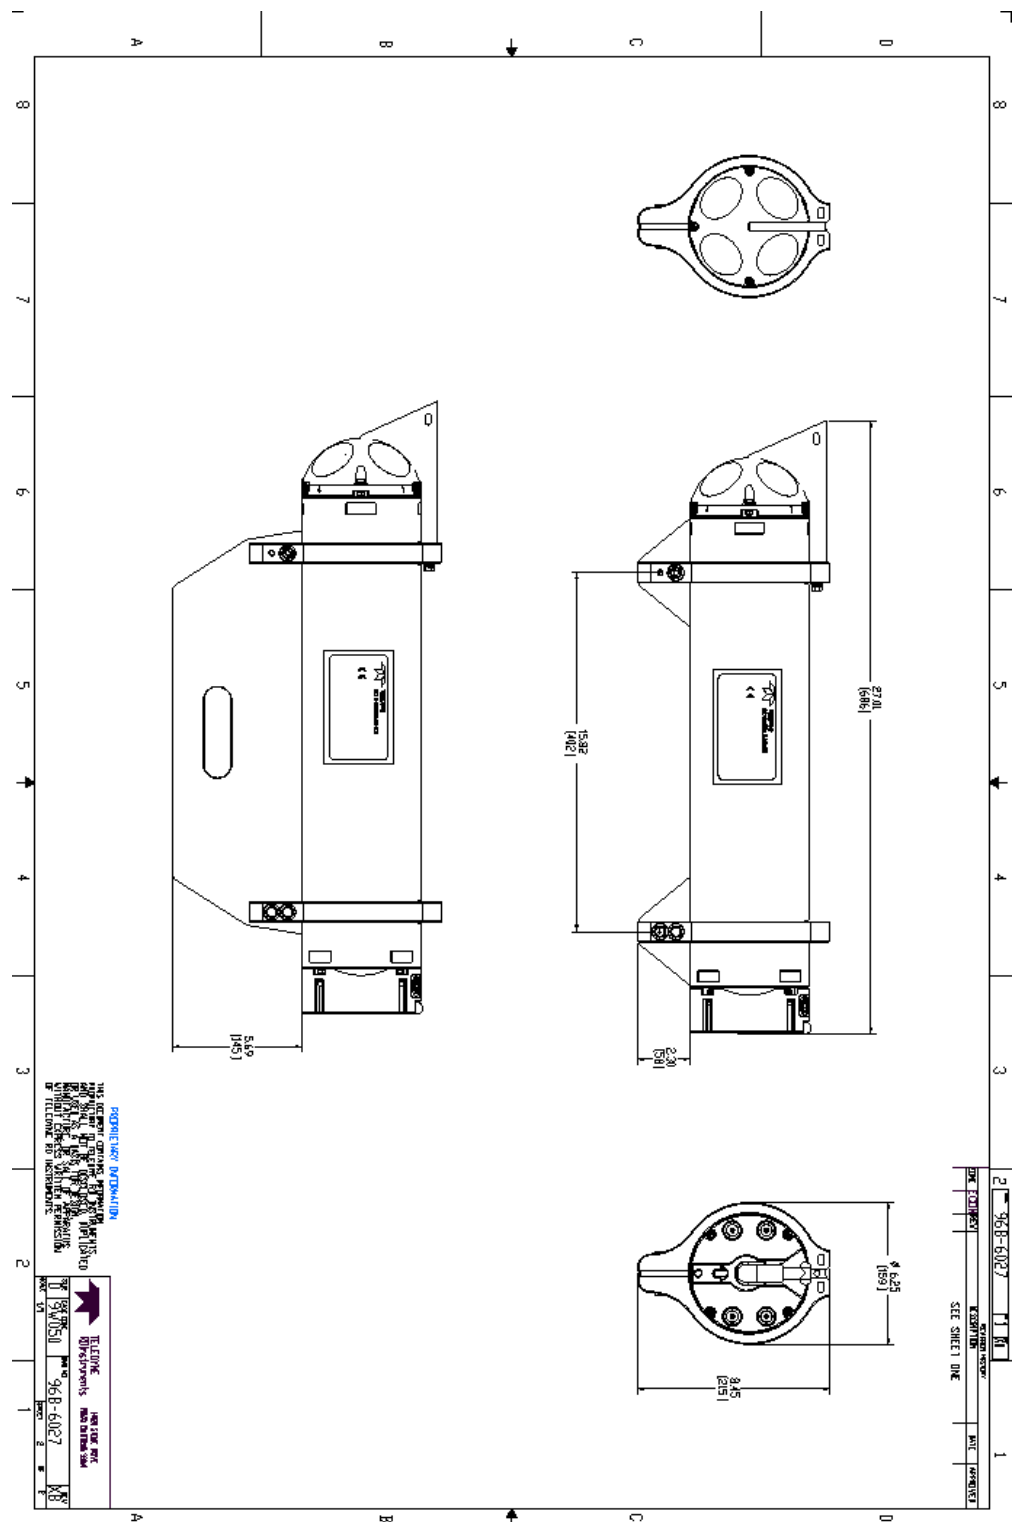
Outline Installation Drawing 96B-6027 Sheet 1
